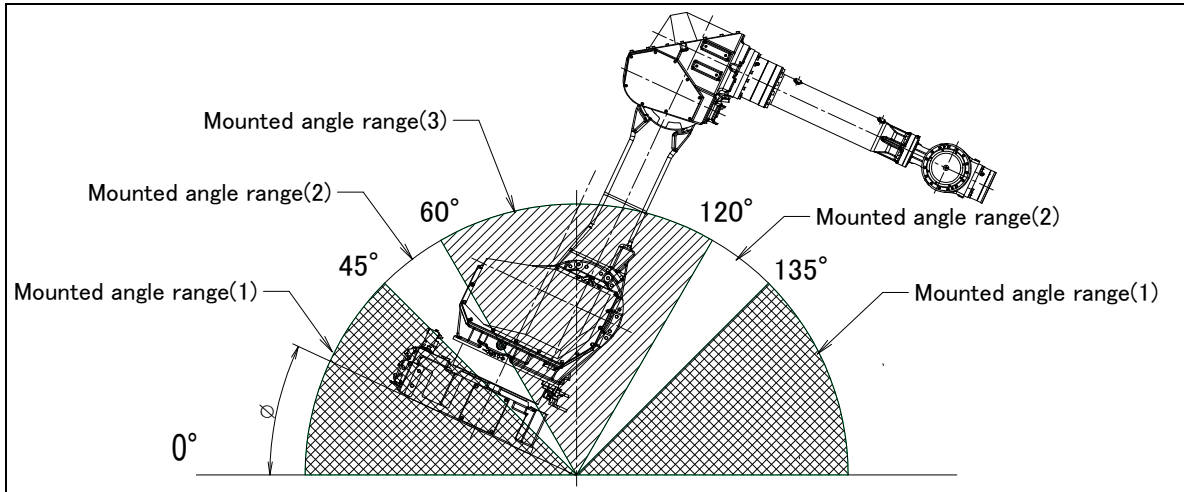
(a) Mounted angle (M-710iC/50, /50E)
